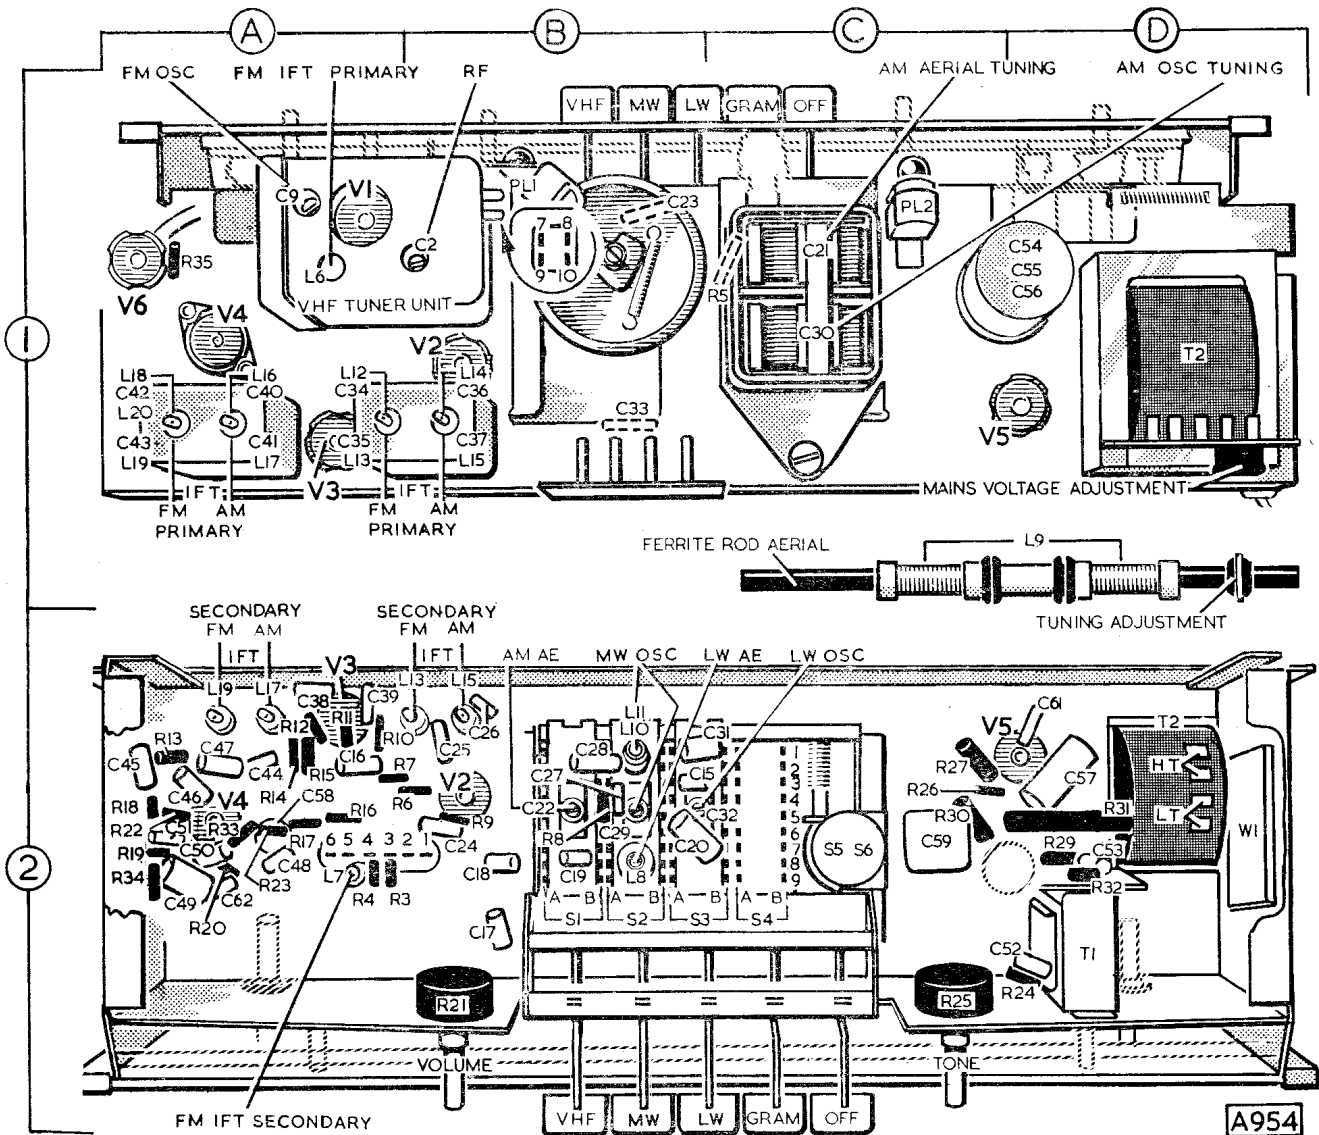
601RG Chassis, showing location of components. For easy reference, components requiring adjustment during ALIGNMENT are indicated outside the chassis area. The 389RG chassis is identical except that the tuning indicator (V6) and associated components are omitted.
